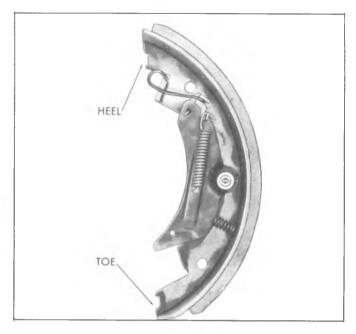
Brake Shoe and Self Adjuster Assembly
